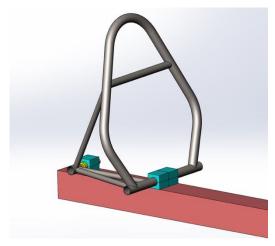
Roll hoop and rear triangle set up, using tube blocks to locate for wheel spacing, solid model.
